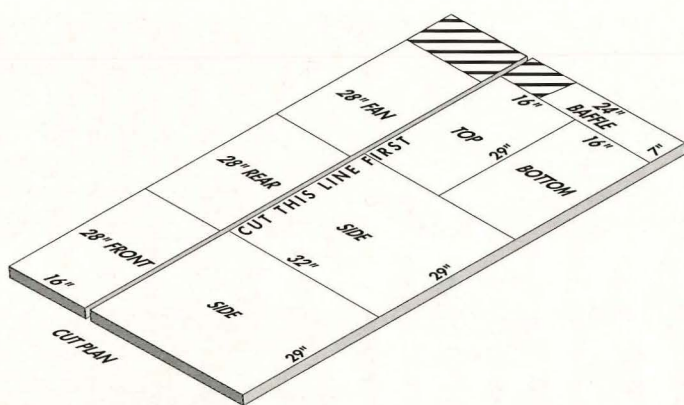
Cut Plan. This diagram shows how to layout the pieces of the fermentation chiller on a two-inch thick extruded polystyrene foam board.
